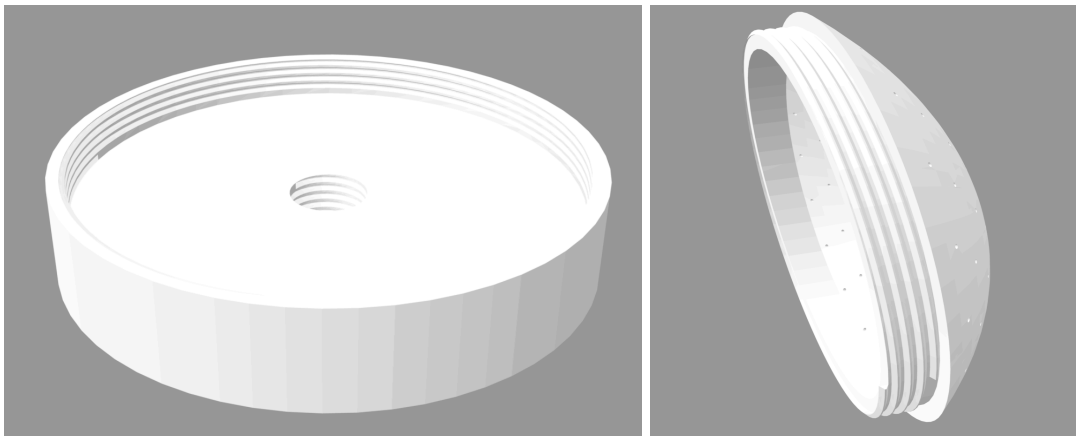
Base of showerhead (left) and cap for showerhead (right).
